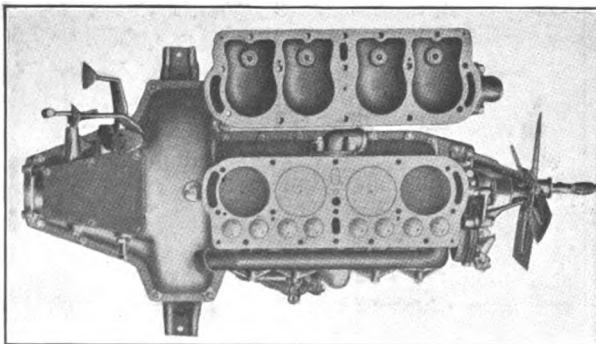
Intake Side of Motor, Showing Frame Supports Which Should Be Inspected for Loose Rivets—These May Require Brasing.
